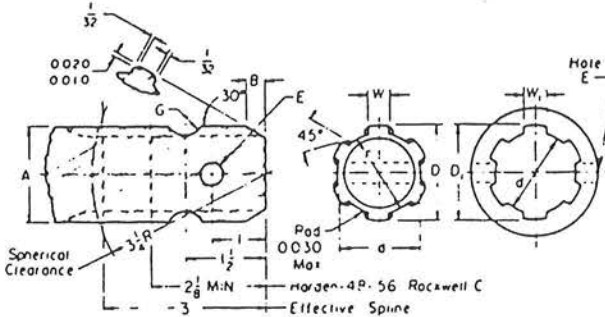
Outline drawing of 1 3/8" 6B splined shaft and coupling
